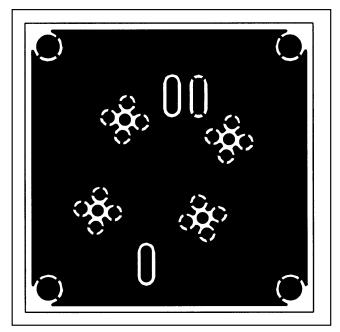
MAX4117 EV Kit PC Board Layout—Solder Side
